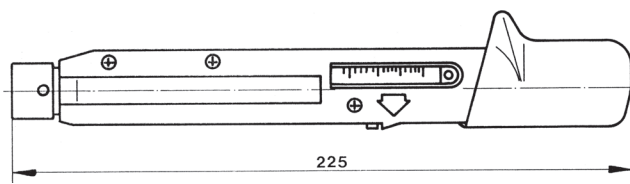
4 ... 20 N-m torque wrench Type 1300A39
